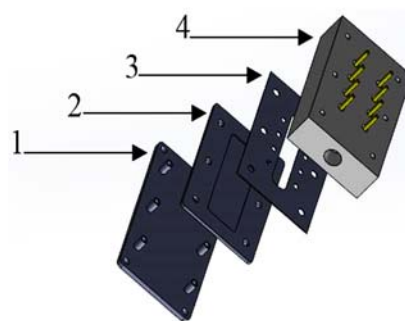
Exploded view of the realized sensor package: (1) base plate; (2) base substrate; (3) sealing layer, and (4) plate with integrated flow path.
